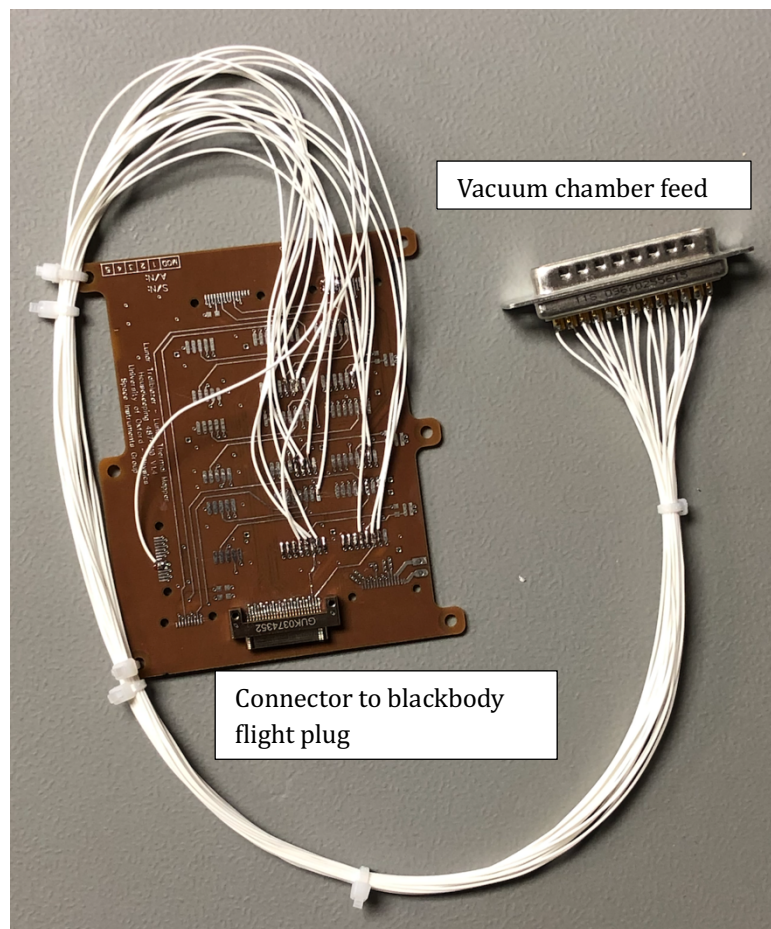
The modified housekeeping board made to feed the PRT connections from the blackbody flight connector out of the vacuum chamber.
